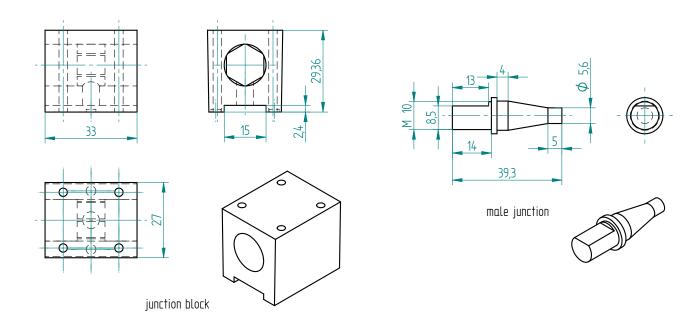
Drawing of the junction block parts  $\frac{1}{2}$
